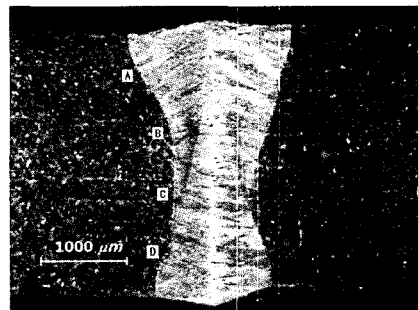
Butt welding Cross-sectional area of the laser beam at P=1.6kW,  $v=1.0\text{m/min}$  and  $z=0.5\text{mm}$
